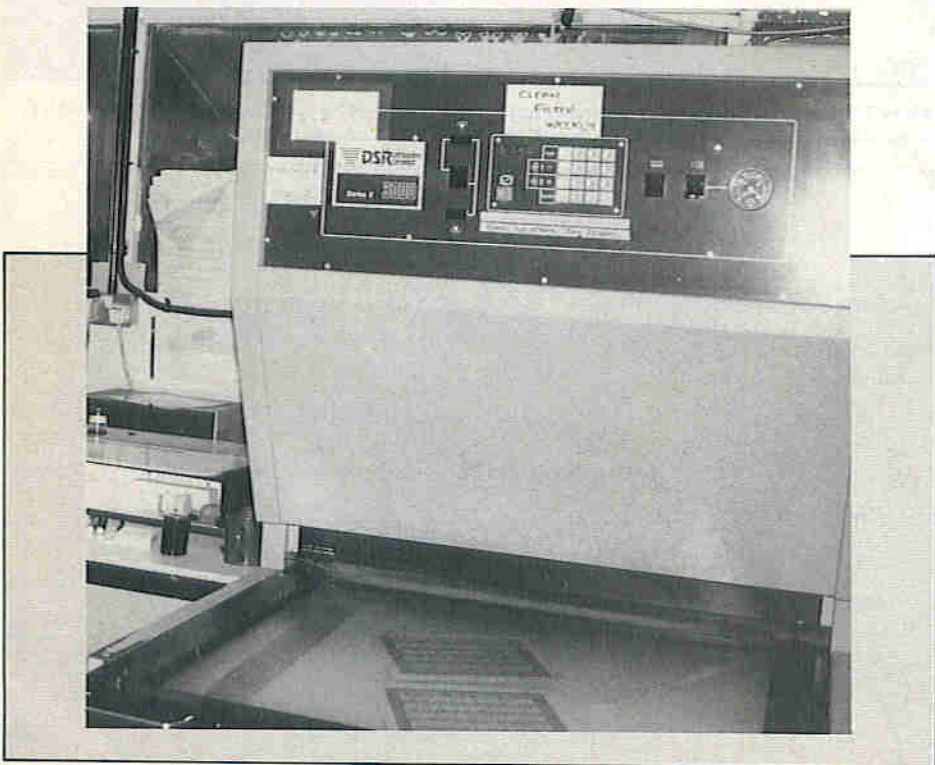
This machine is responsible for exposing both sides of the phototool-clad boards to controlled amounts of ultra-violet light.
